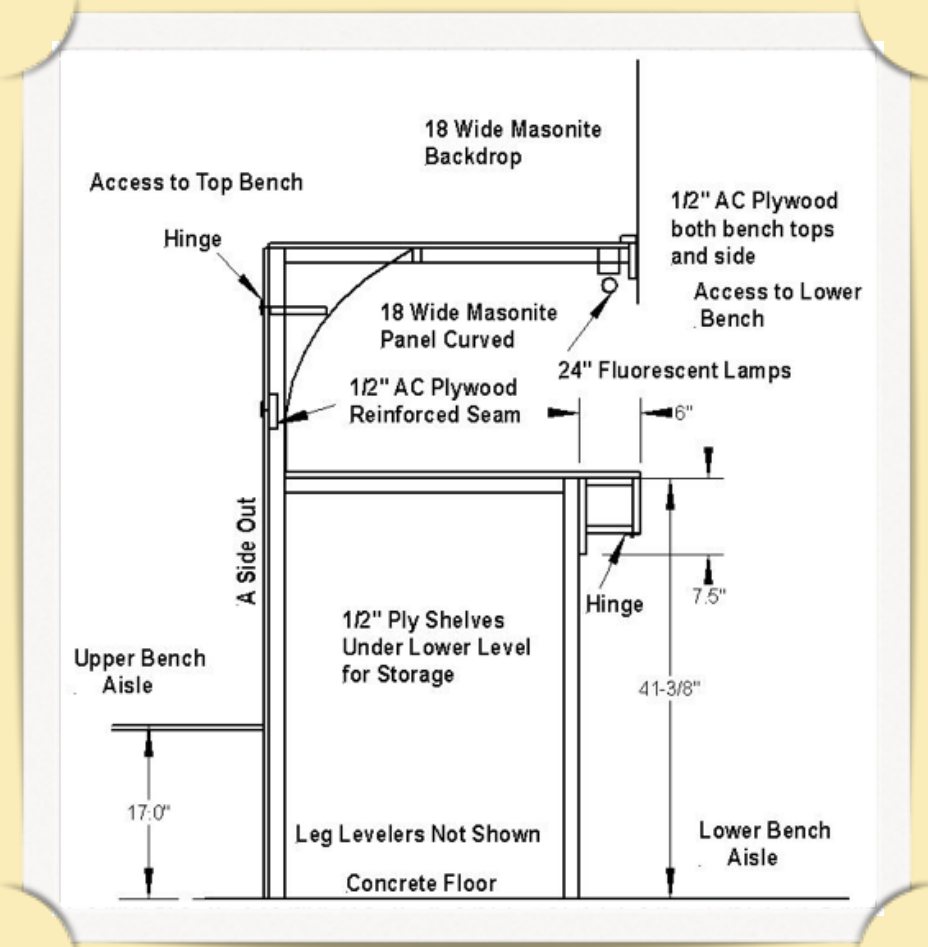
Bench details, end view. The F shaped (plus a second leg) have 3/8" carriage bolts screwed into nuts welded to each leg for levelers.
